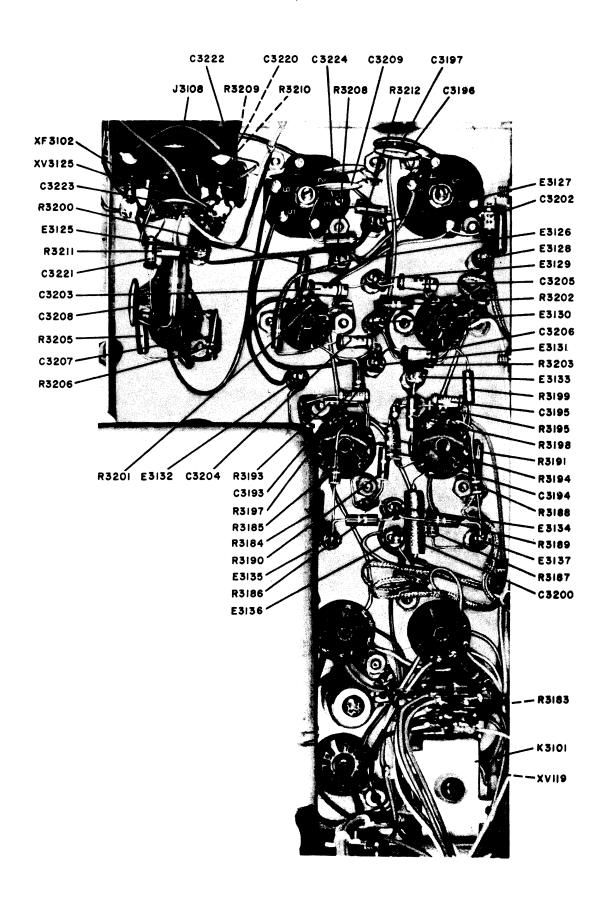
R-F scillat r O-243/FRT-24, Section A, Locati n f Parts
